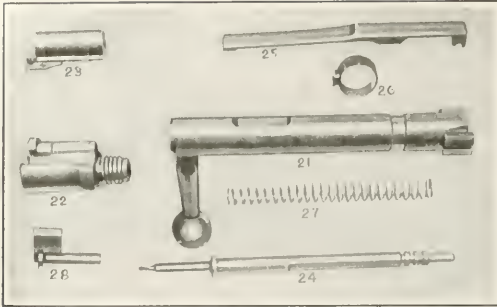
Mauser Rifle Bolt, Plug, Cocking-piece, Safety Lock, Extractor, Extractor Collar, Main Spring and Striker
